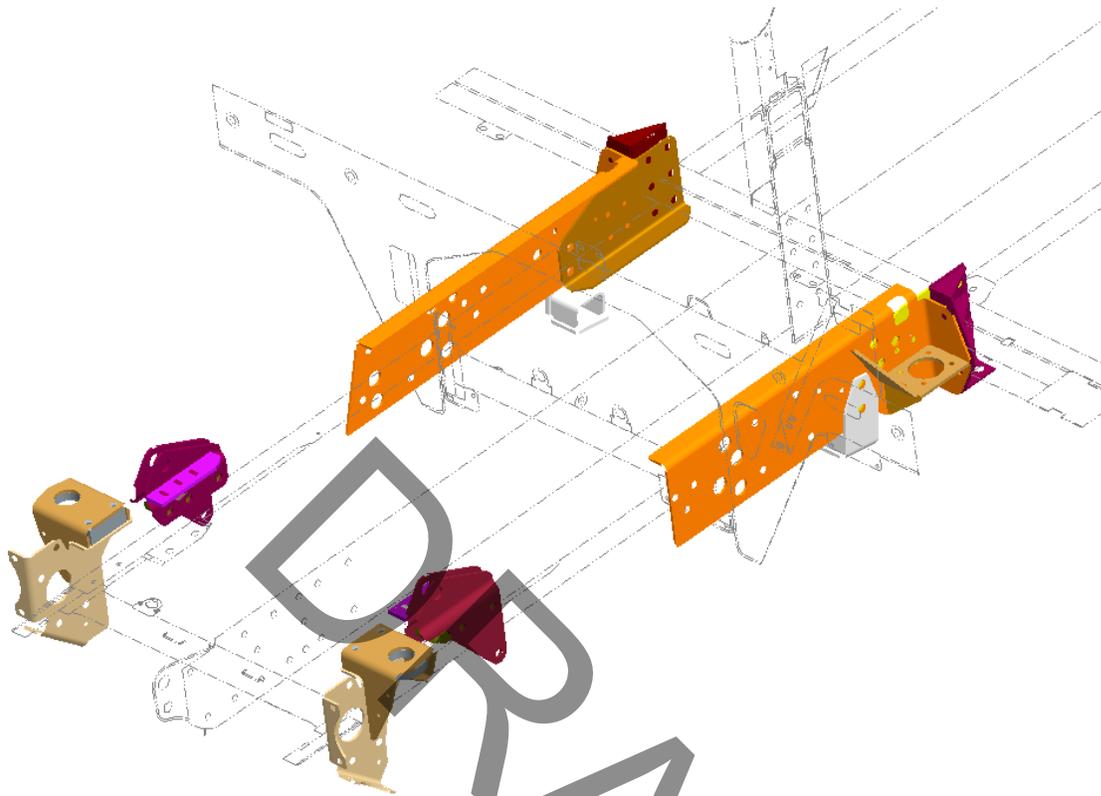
COMPLETED INSTALLATION ASSEMBLY
